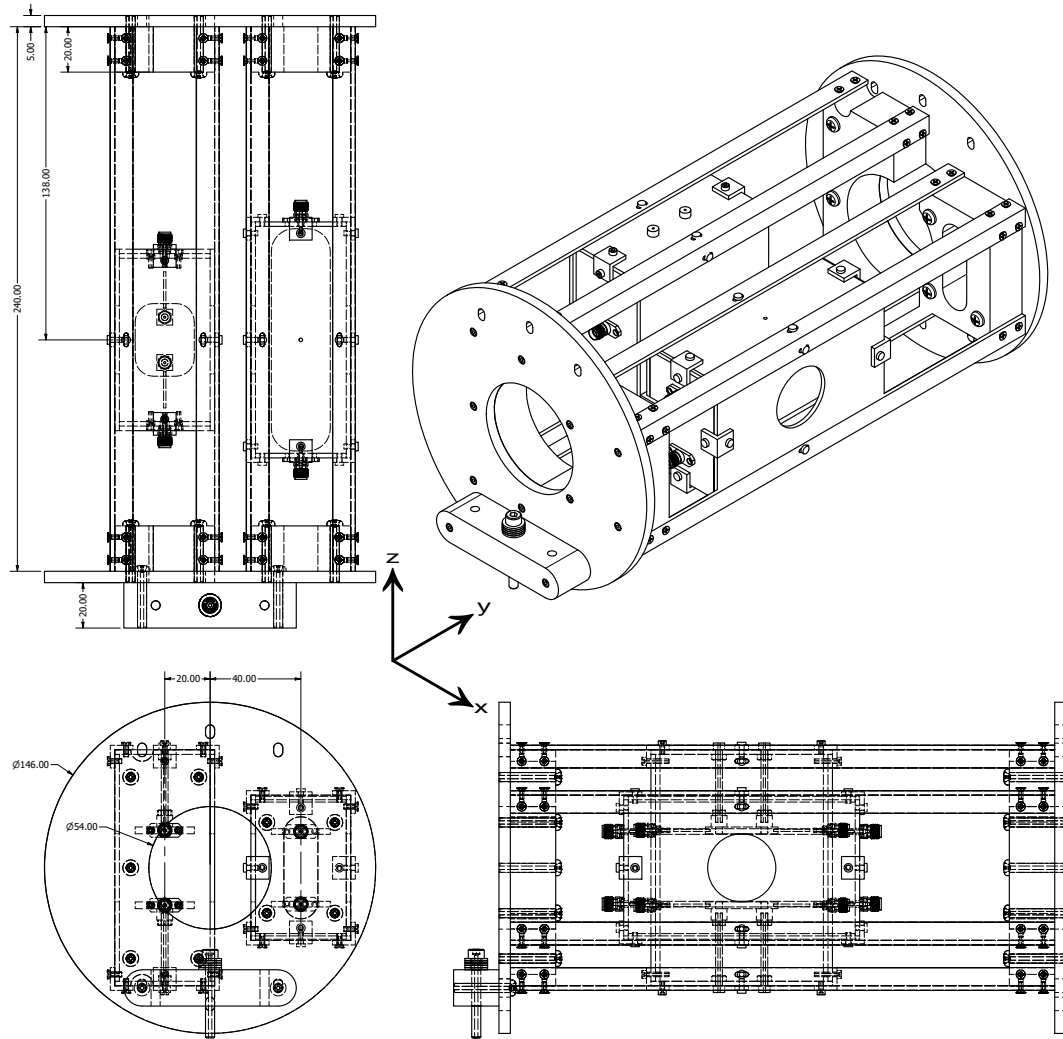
2D drawing of the aluminum support with the MW apparatuses mounted on it.
